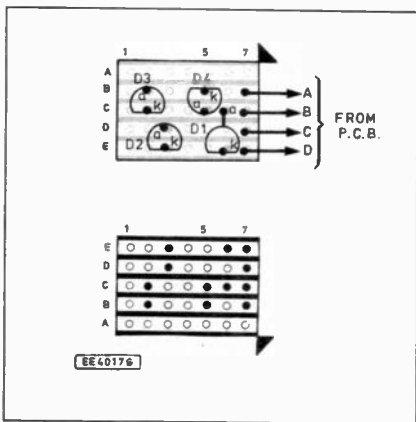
Stripboard l.e.d. display layout. There are no breaks in the underside copper tracks.
